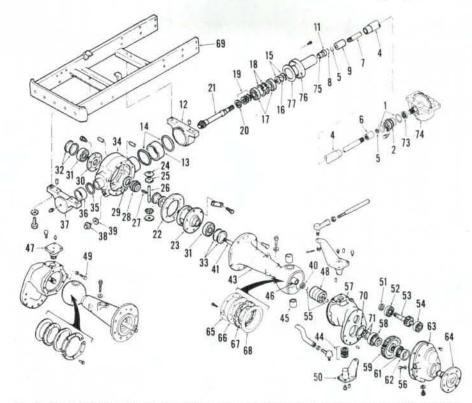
Exploded view of front wheel drive axle assembly typical of type used on 1500 and 1700 models. The front wheel drive axle used on 1900 models is similar.
